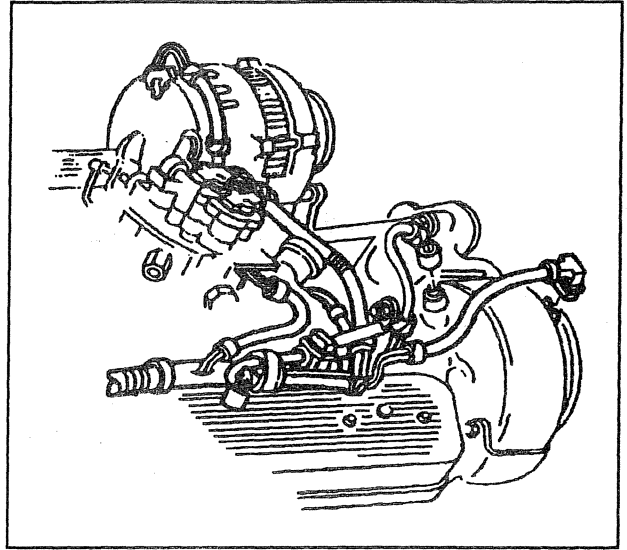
Engine Wiring to A/C Compressor (4.3L)
